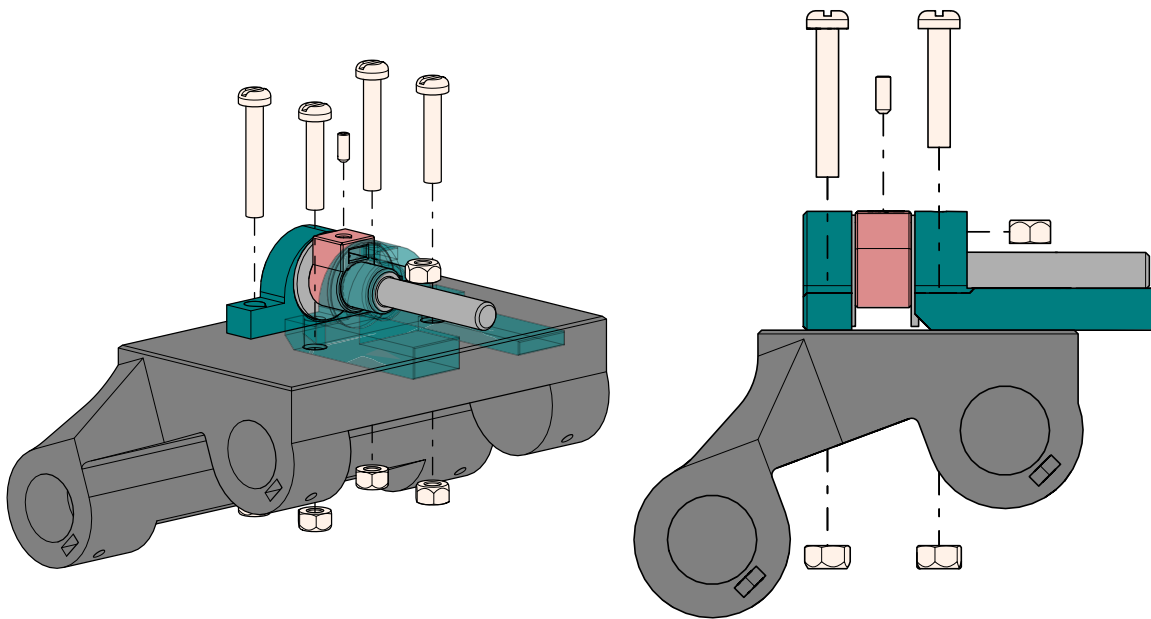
Screws securing the shaft assembly to the lower part of the base. The upper part is omitted for clarity. Left : 3D view; right : side view (sagittal plane).
